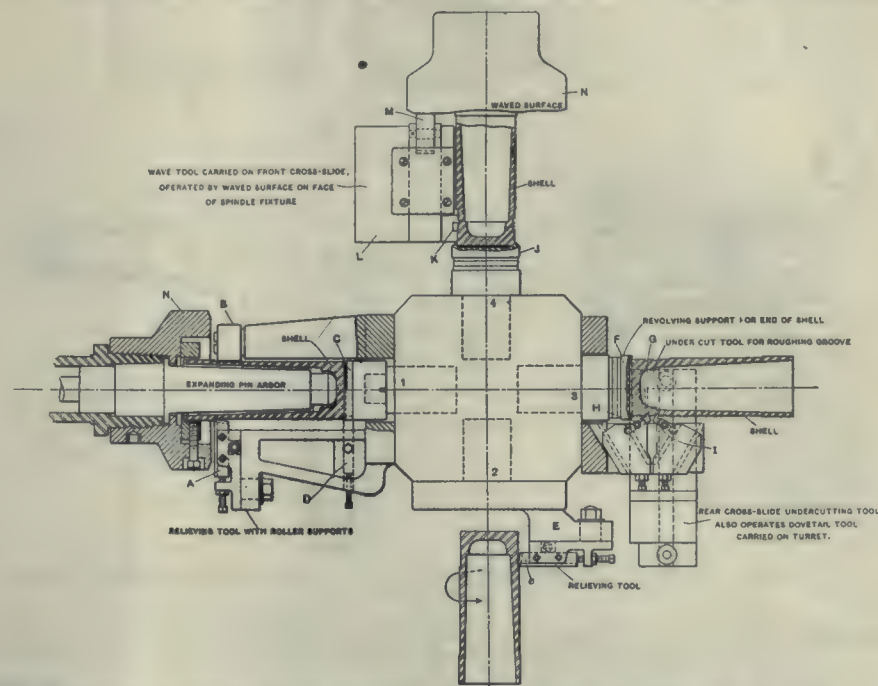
TOOL LAYOUT, FIRST SETTING FOR MACHINING SHRAPNEL SHELL FORGINGS.
